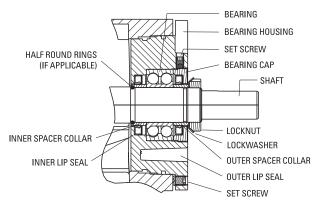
THROUGH G1-82 BEARING HOUSING ASSEMBLY
